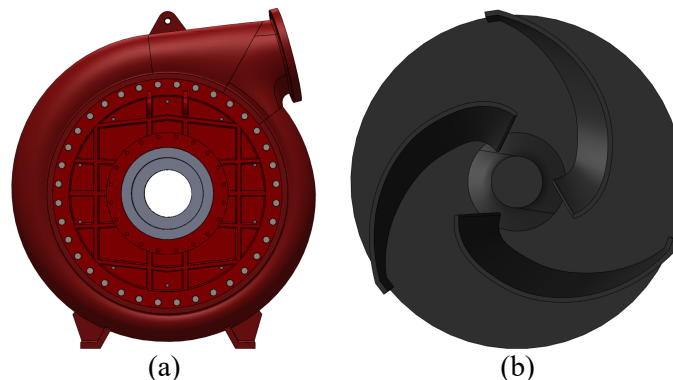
3D model of the centrifugal pump; (a) casing, (b) impeller.
